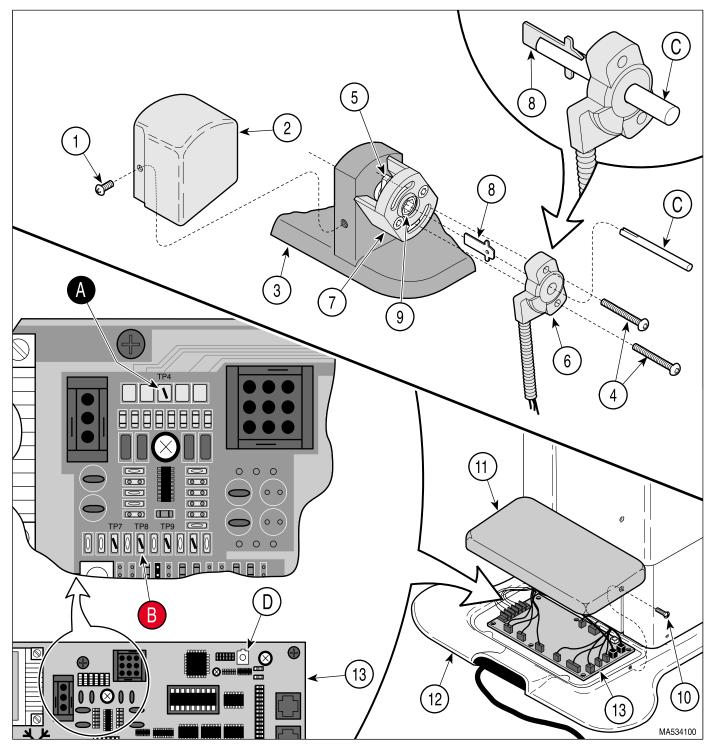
Tilt Position Sensor Removal / Installation / Adjustment
